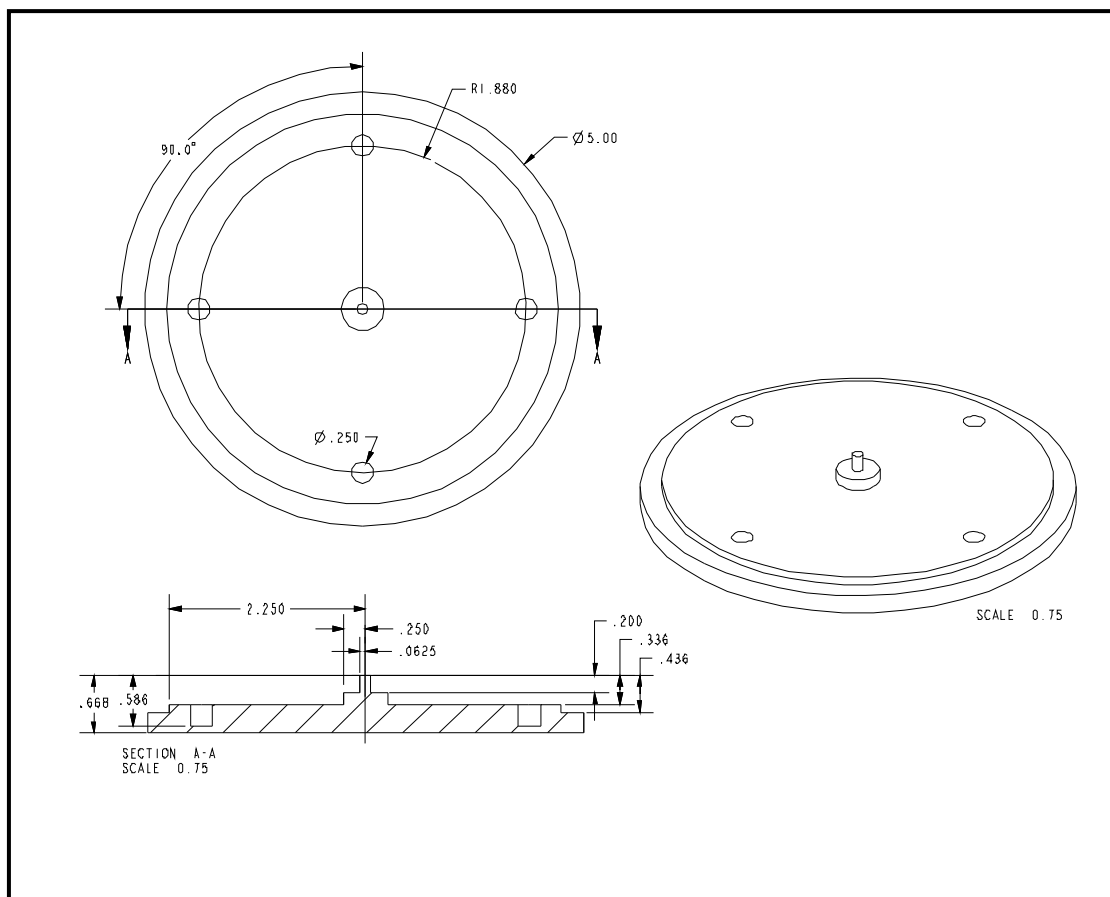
CAD Drawing of the Standard JSR Mold – Bottom Plate (Material: Aluminum, Filename: standardbottom.drw).
